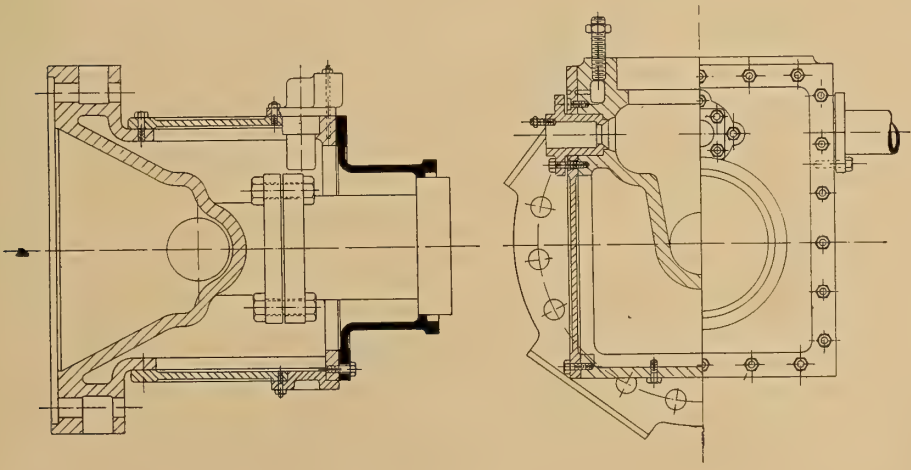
DETAILS OF KOERTING CYLINDER HEAD, AS BUILT BY THE DE LA VERGNE MACHINE CO., NEW YORK
